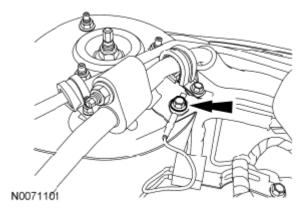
Locating Retainer Courtesy of FORD MOTOR CO.
